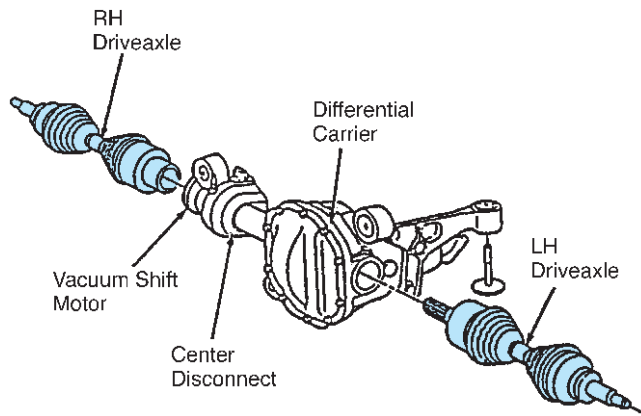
Front axle assembly for independent front suspension (IFS); note the axle assemblies, which are similar to those of a FWD car. (Courtesy of Ford Motor Company)
